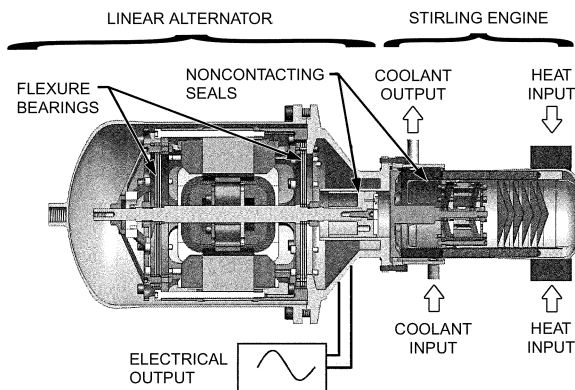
Cutaway Core of a Free-Piston Stirling Engine
